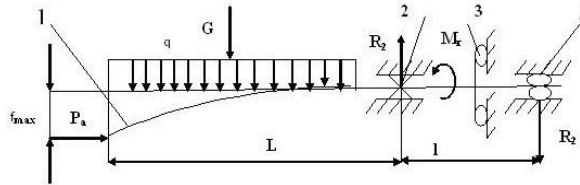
Shaft load diagram; 1 - elastic line of the shaft, 2 - prop shaft, 3 - thrust bearing, 4 - radial bearing
